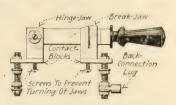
Showing method of preventing knife-switch jaws from turning.
